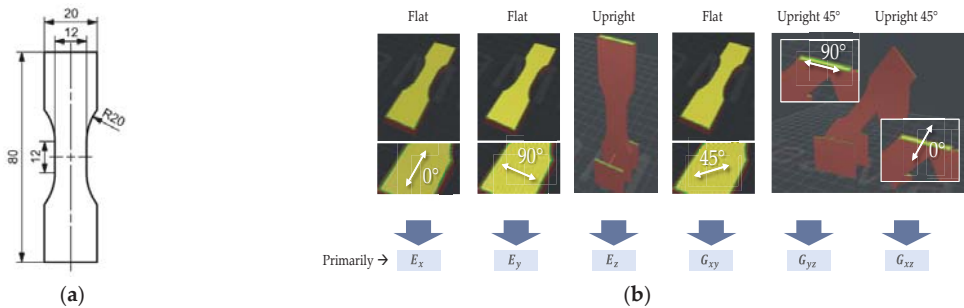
Specimen geometries: (a) Becker specimen, technical drawing; (b) Specimen alignment and infill and their allocation to orthotropic constants, sliced by Raise3D ideaMaker software [38].
